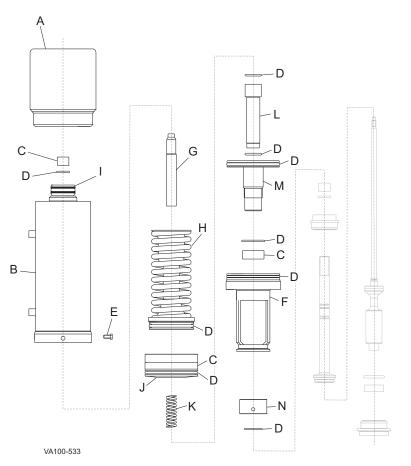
Actuator Assembly (generic valve assembly shown for reference)
